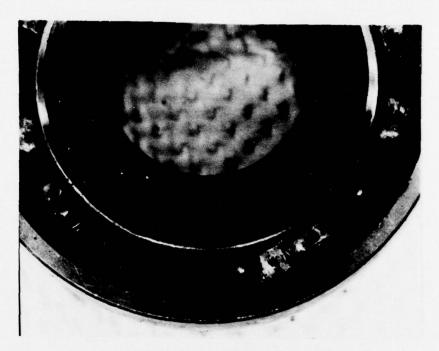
Bearing S/N TRL-8. 2.5x Enlarged View.
